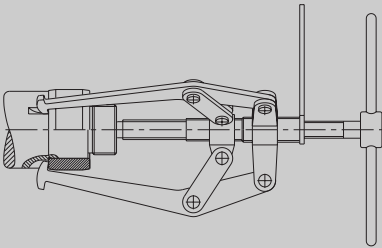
Dismounting of Inner Ring of Cylindrical Roller Bearing by using a Extraction Tool
